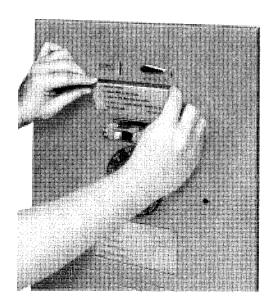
Installing Instruction Card in 2-Type Set With 812360410 Card Spring
